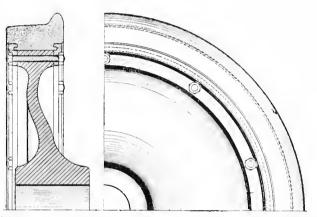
Paige Plate Coach Wheel. Cast Iron Spider with Steel Plates Secured by Bolts.
